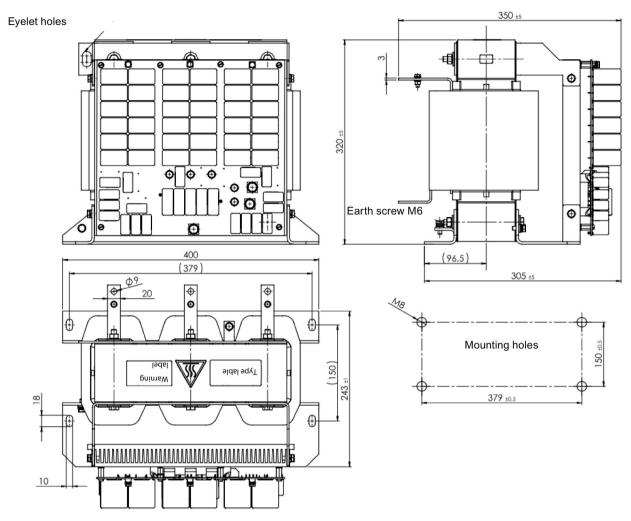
Dimensions for JTA:TEF1203-0KB
